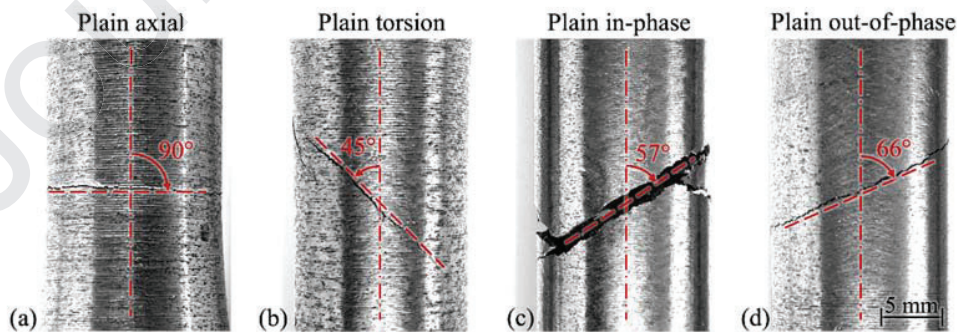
Fatigue cracks in specimens made of DCI GJS-660, subjected to different loading conditions: (a) axial loading $R = -1$, (b) torsional loading $R = -1$, (c) in-phase multiaxial loading $\lambda = 1$, $R = -1$, $\varphi =$
